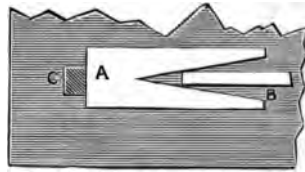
WEDGE FOR HOLDING BOARDS.
